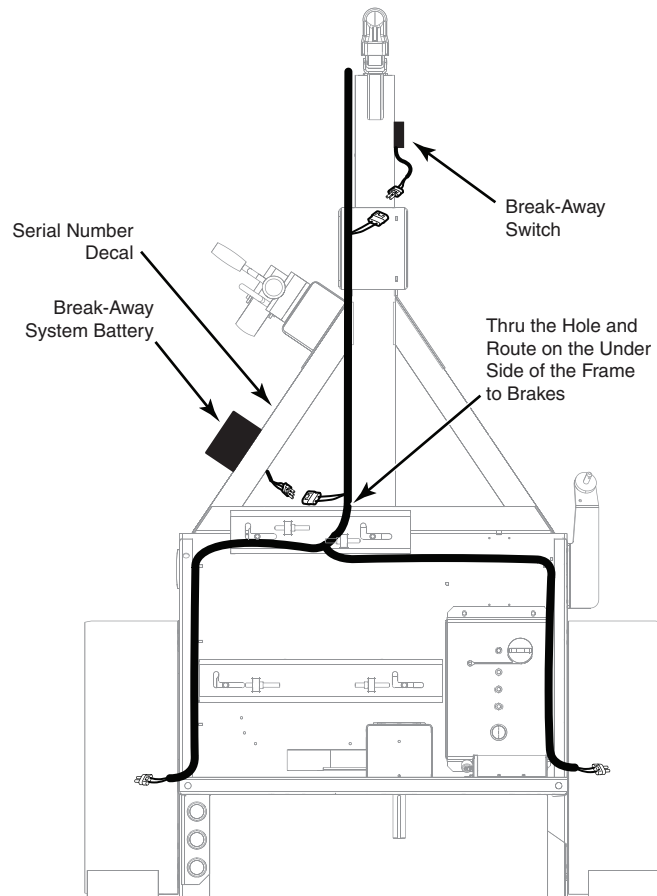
TLB25-48KBD & TLB25-49KBD Brake Kit Wire Harness Connection
